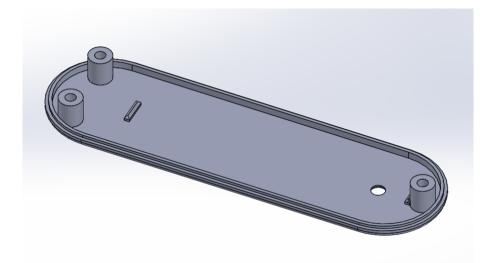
The Inner Side of the Bottom Piece of the Encasement
